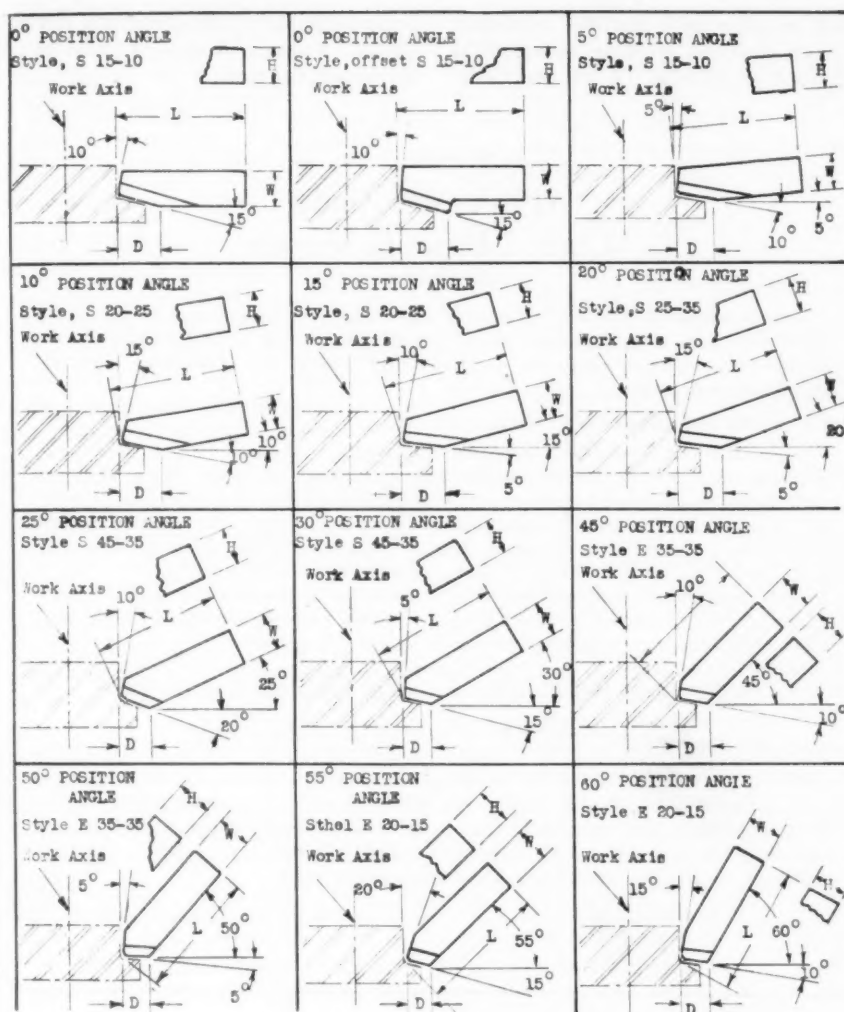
TYPICAL TURNING-TOOL STANDARDS SKETCHES
